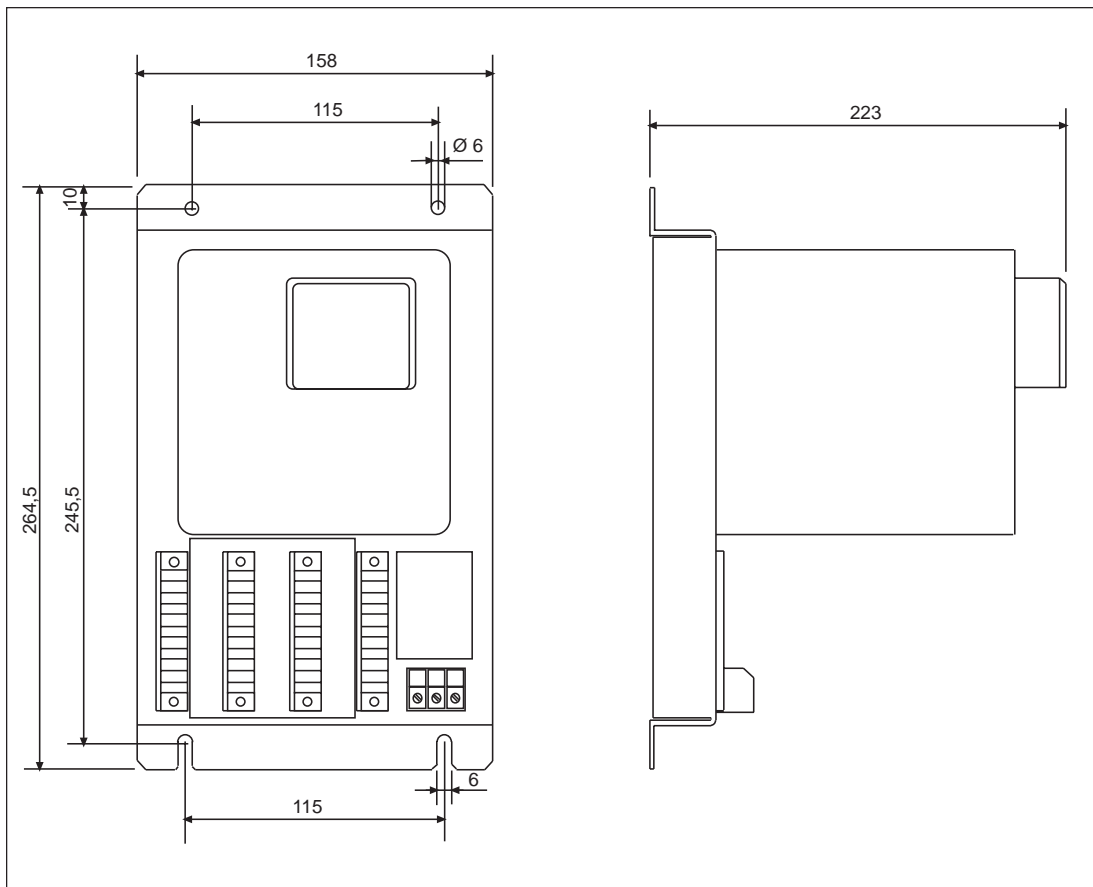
Mounting drawing and dimensions of the control and measuring unit SPOC.
